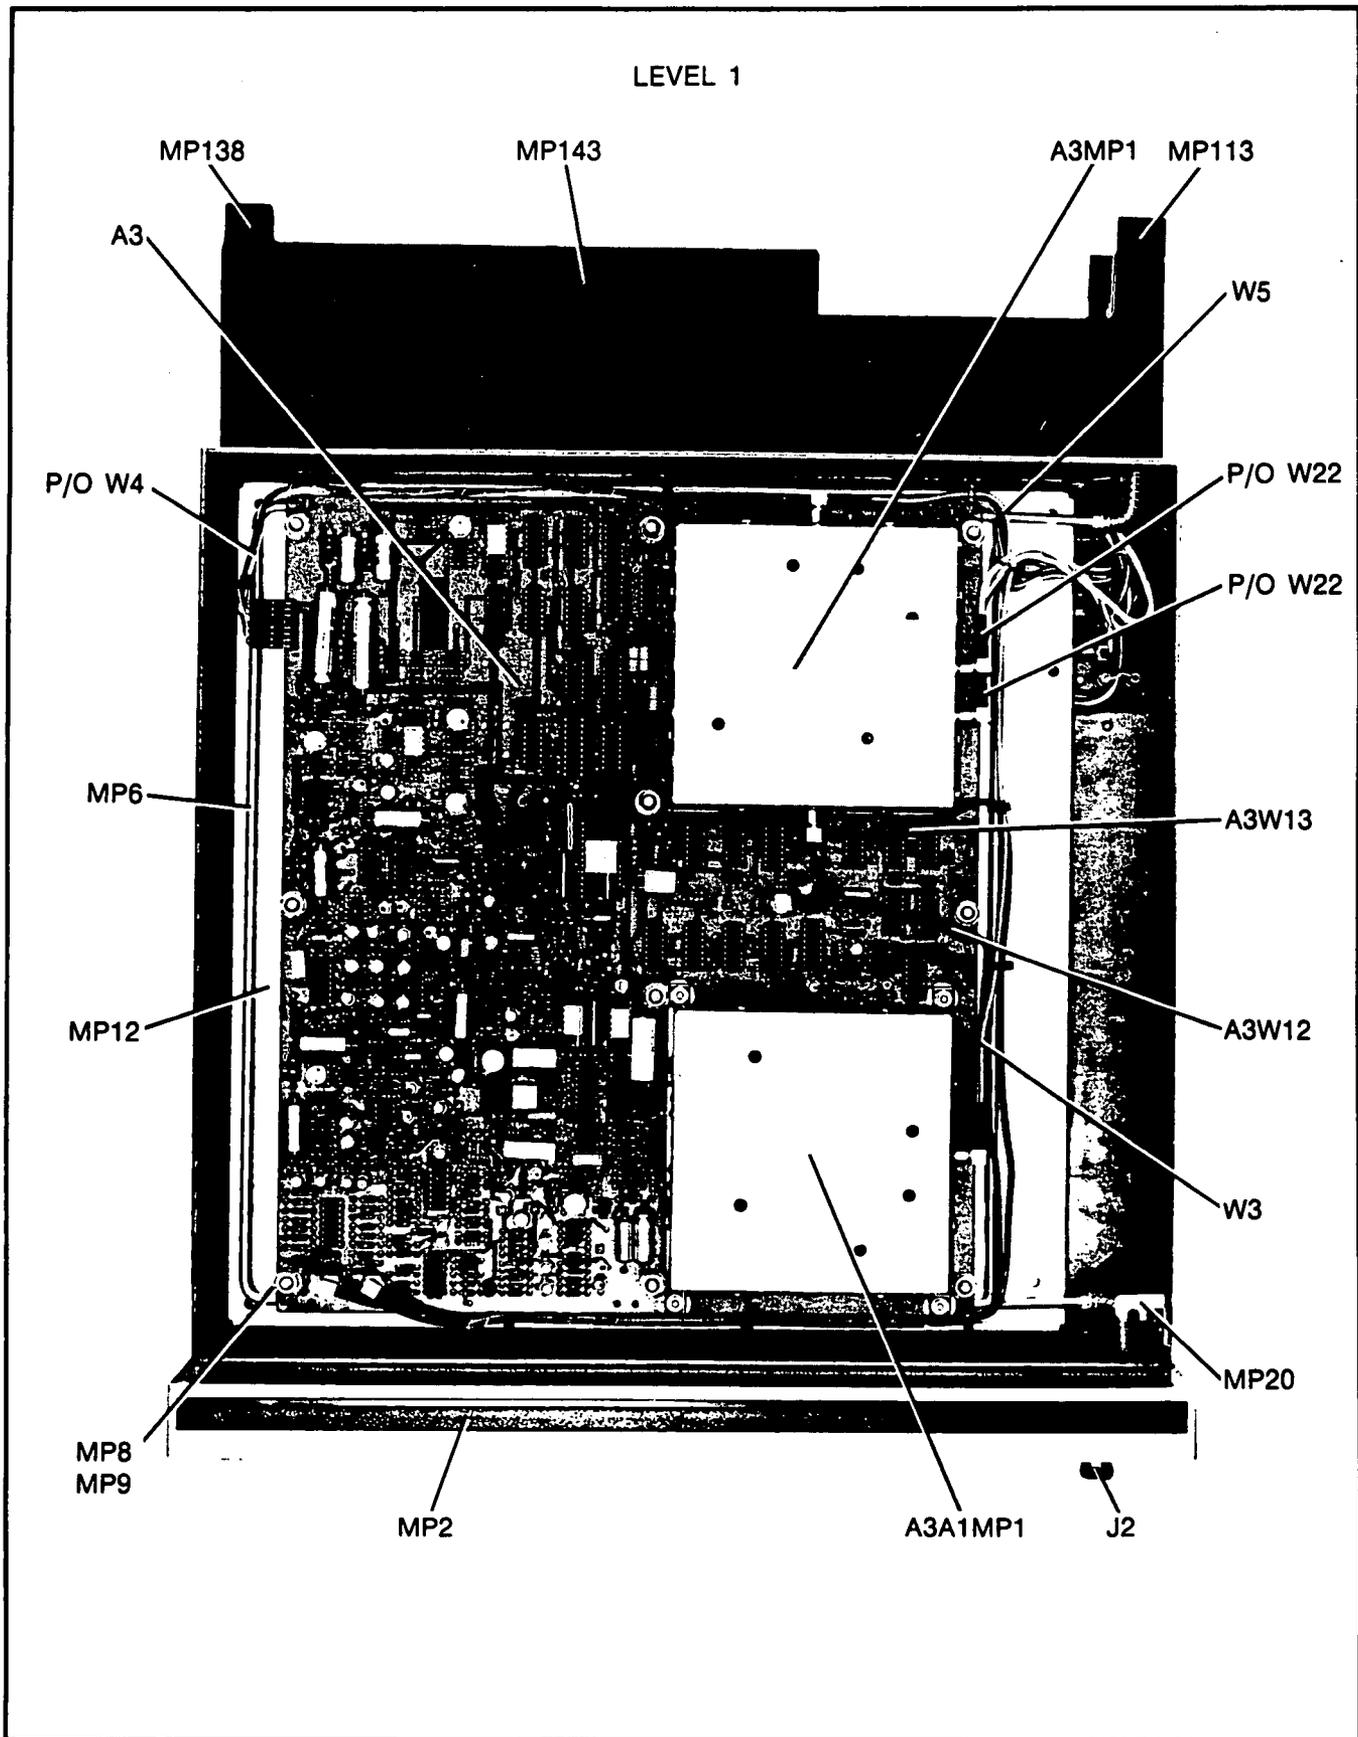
(2425A to 2509A). Top Internal View; Top Cover Removed
